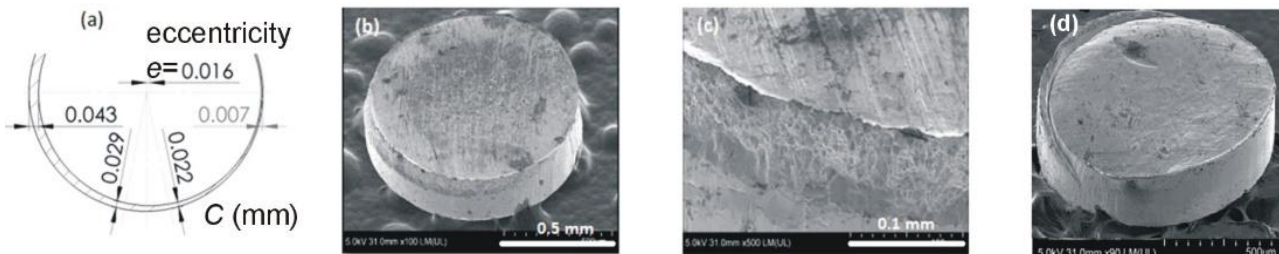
Eccentric tools for micro-blanking; (a) main dimensions, (b) blanked disc (c) close-up of burr in (b); (c) disc after MC
